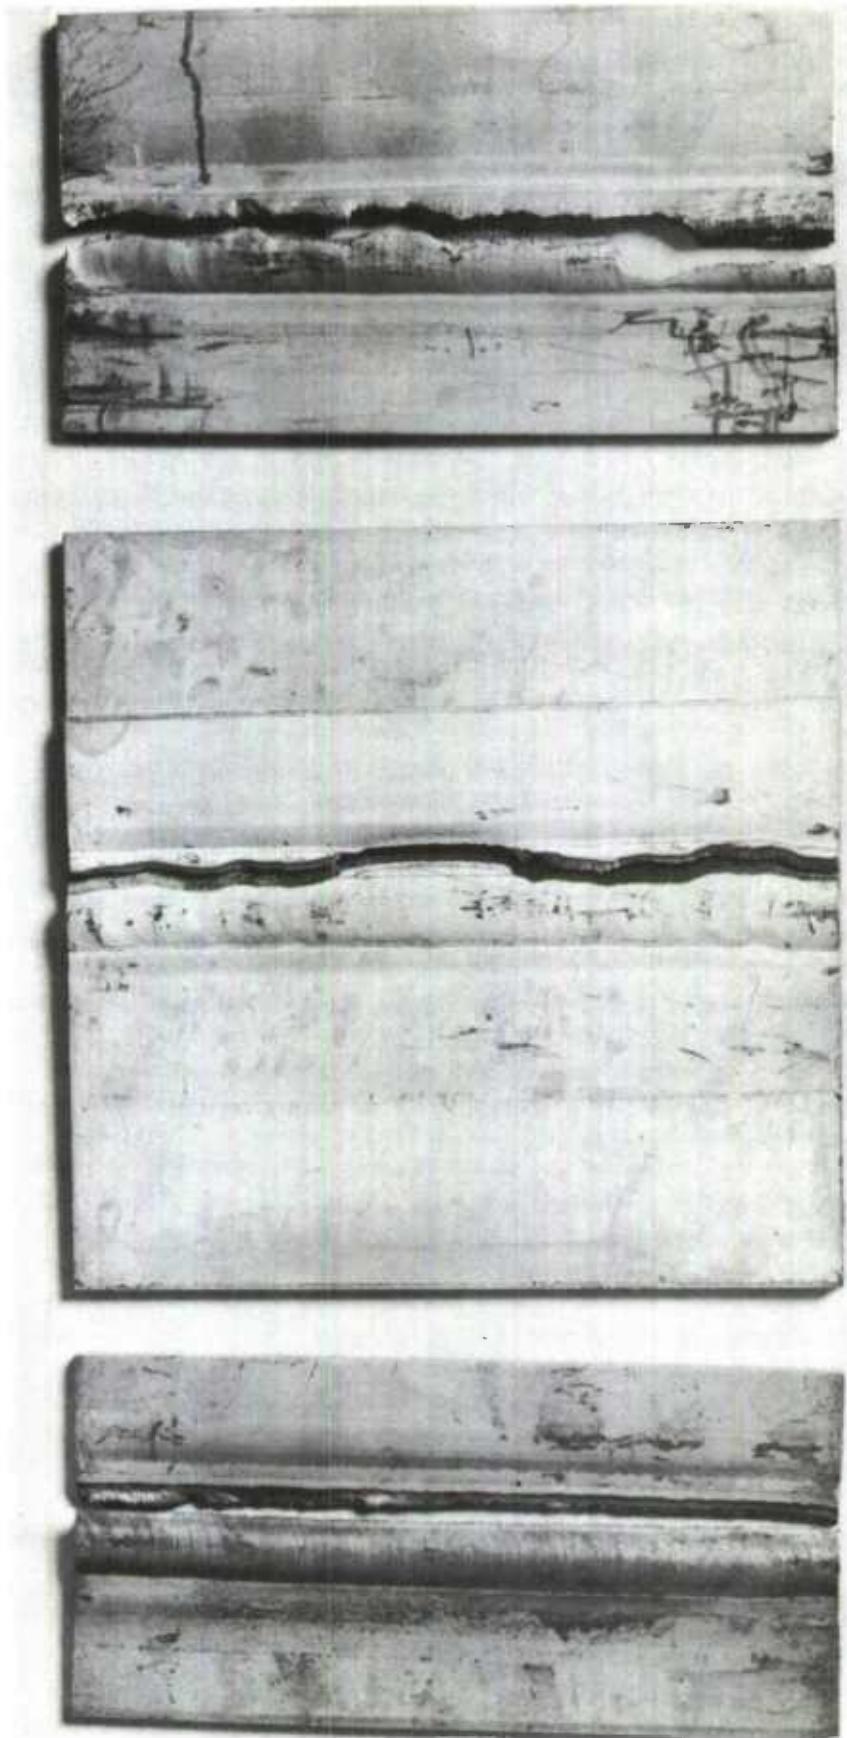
Fractured Fatigue Specimens - 2014-T6 Aluminum Alloy (78° F)
